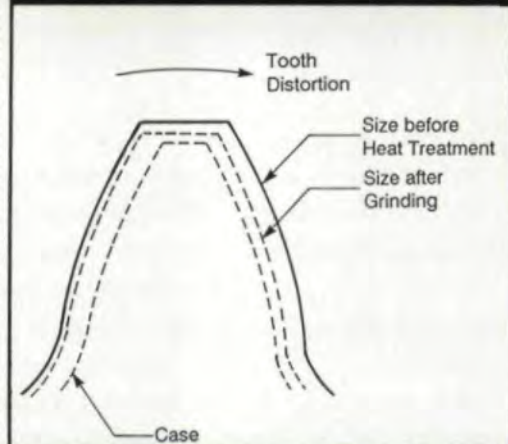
Schematic of material ground from a distorted gear tooth.
